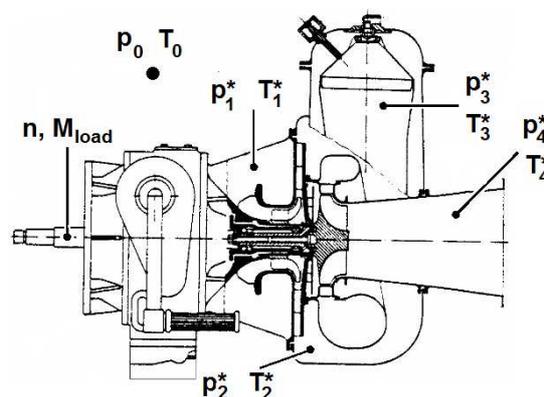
Longitudinal section of Klöckner-Humboldt-Deutz T216 turbine engine (based on [10])
